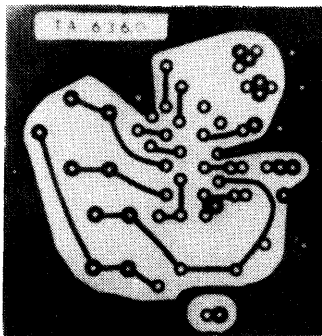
Template of CA3139Q circuit board (actual size, bottom view).
